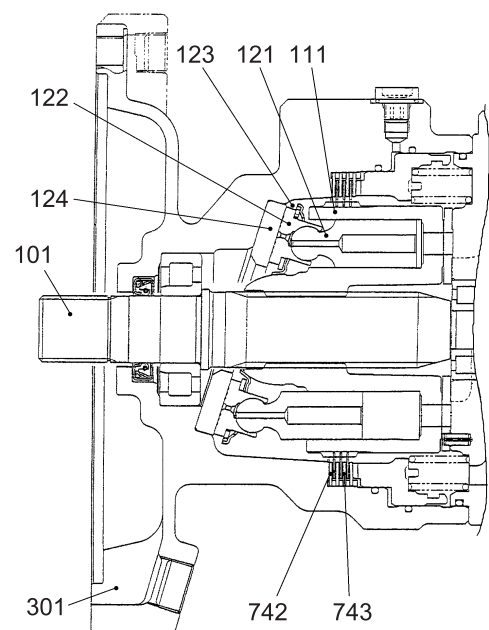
Drawing cylinder block (111), piston sub assy, friction plate (742) and separator plate
